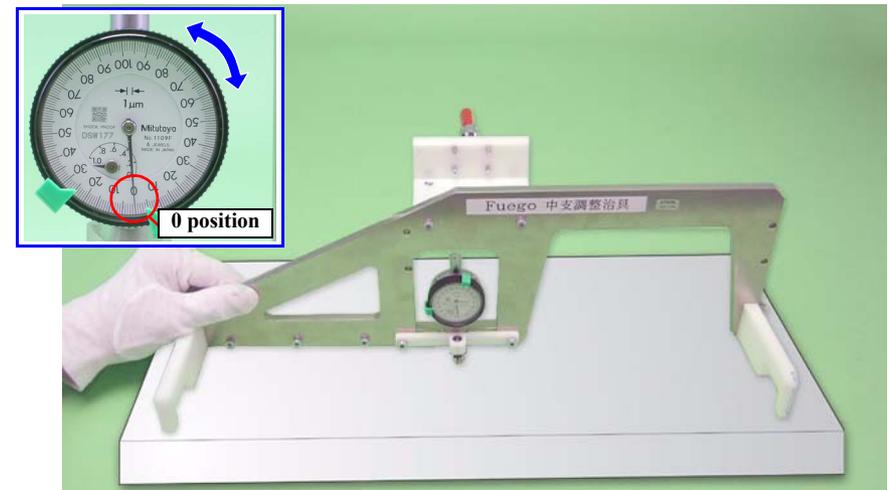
Setting the PF Roller Shaft Position Adjustment Jig
